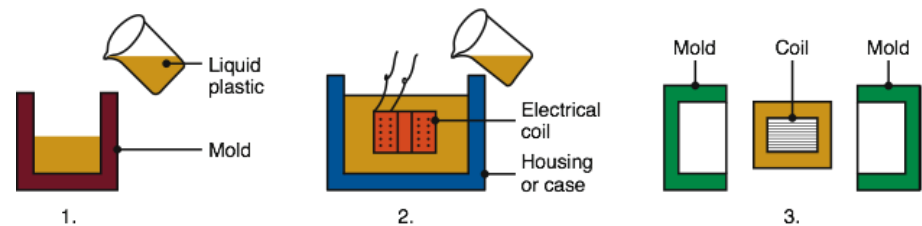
Steps in the casting of plastic parts using a lead shell mold.
